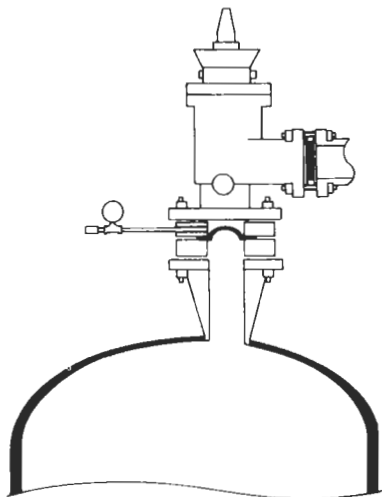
Safety valve and rupture disk installation using pressure rupturing disk on inlet to safety relief valve, and low pressure disk on valve discharge to protect against back flow/corrosion of fluid on valve discharge side, possibly discharge manifold. By permission, Fike Metal Products Div., Fike Corporation, Inc.
